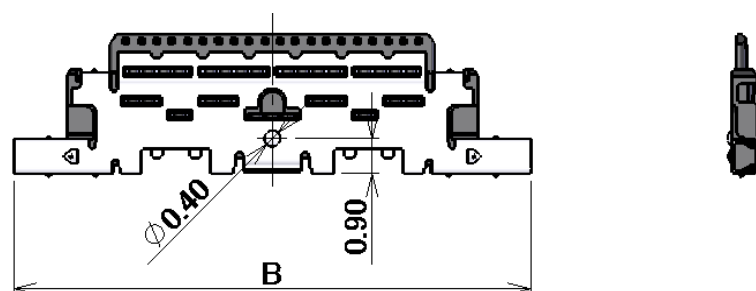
The SHELL bottom side of PLUG HSG ASS'Y(20P)
